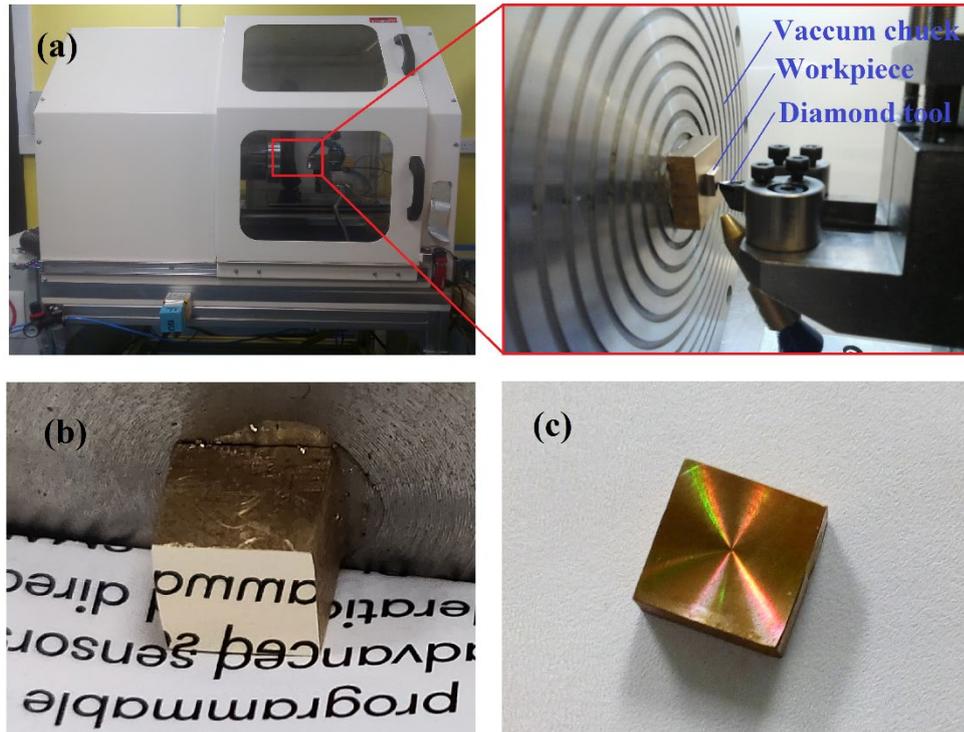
Fabrication of brass stamp with SPDT. (a) Machining set up. (b) Brass stamp after flat turning. (c) Brass stamp after microstructure fabrication.
